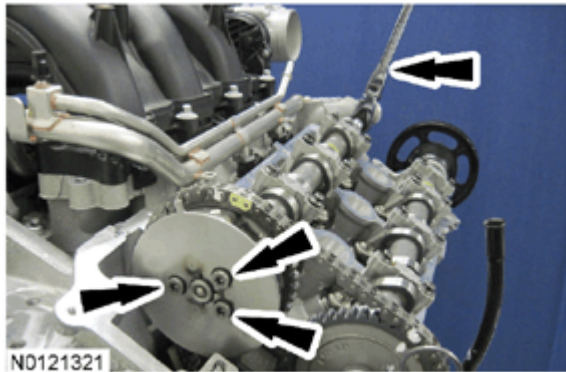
Removing Camshaft Phaser And Sprocket Bolts
